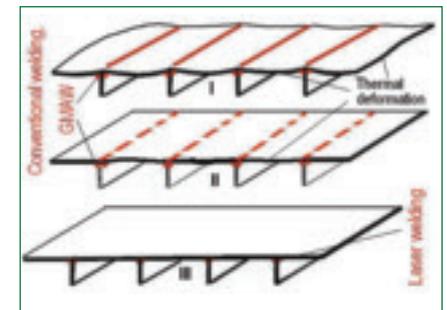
Comparison of the thermal deformations to metal plates resulting from gas metal arc welding vs. laser beam welding.
